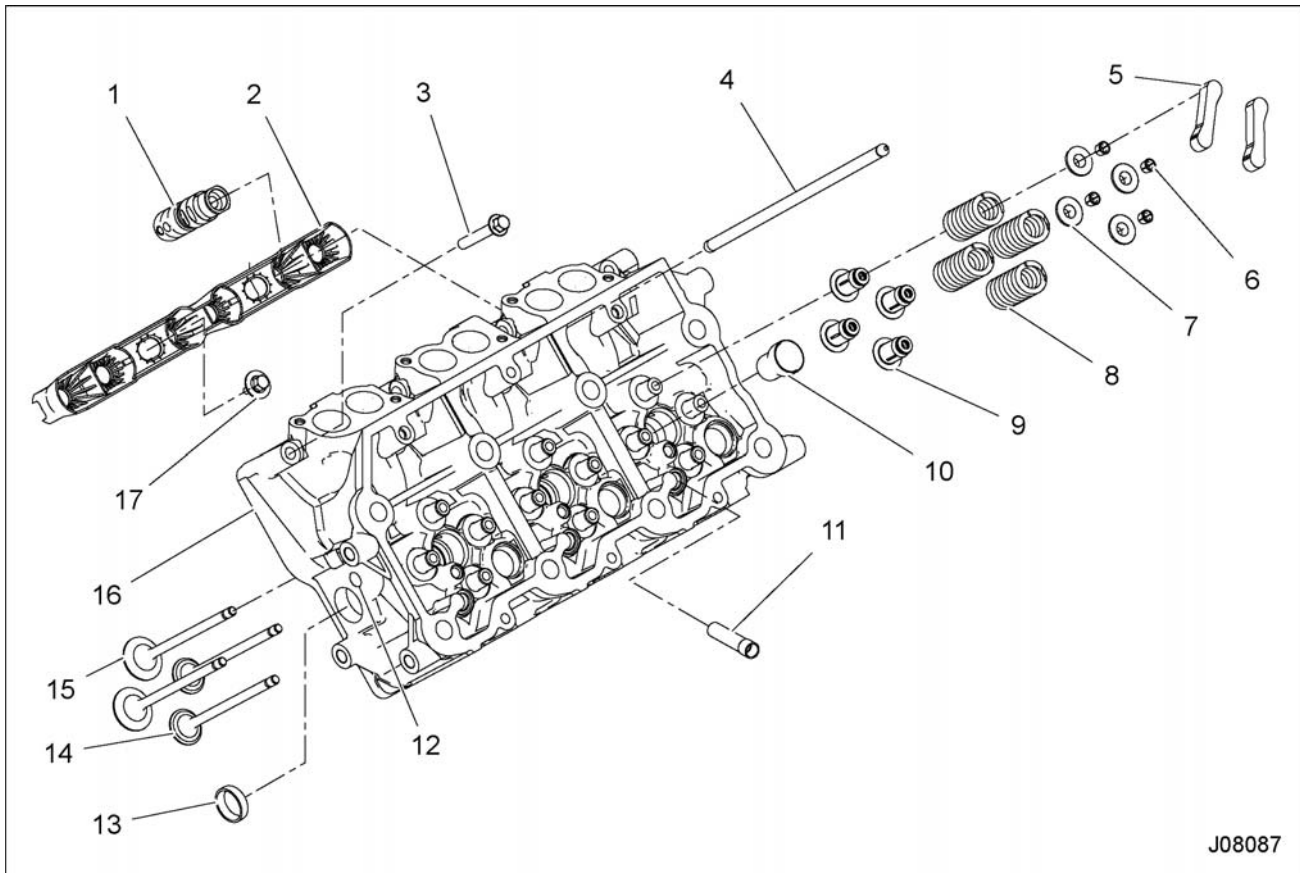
Cylinder head, rocker arm carrier, valve covers, and crankcase breather
